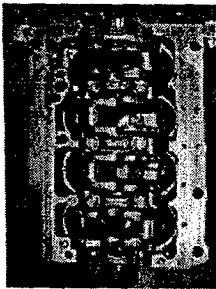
Bottom view of the engine block with the crank and main bearings
